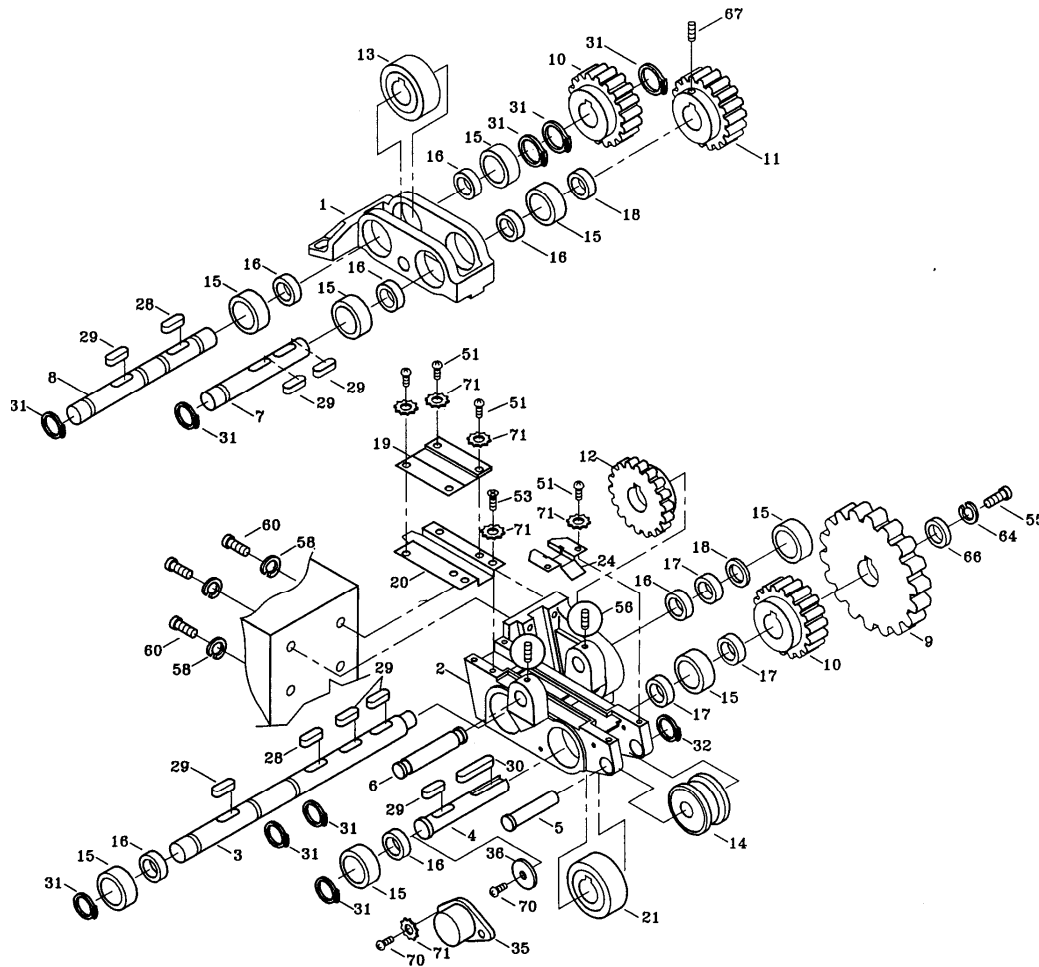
STRAP FEED/TENSION ASSEMBLY
